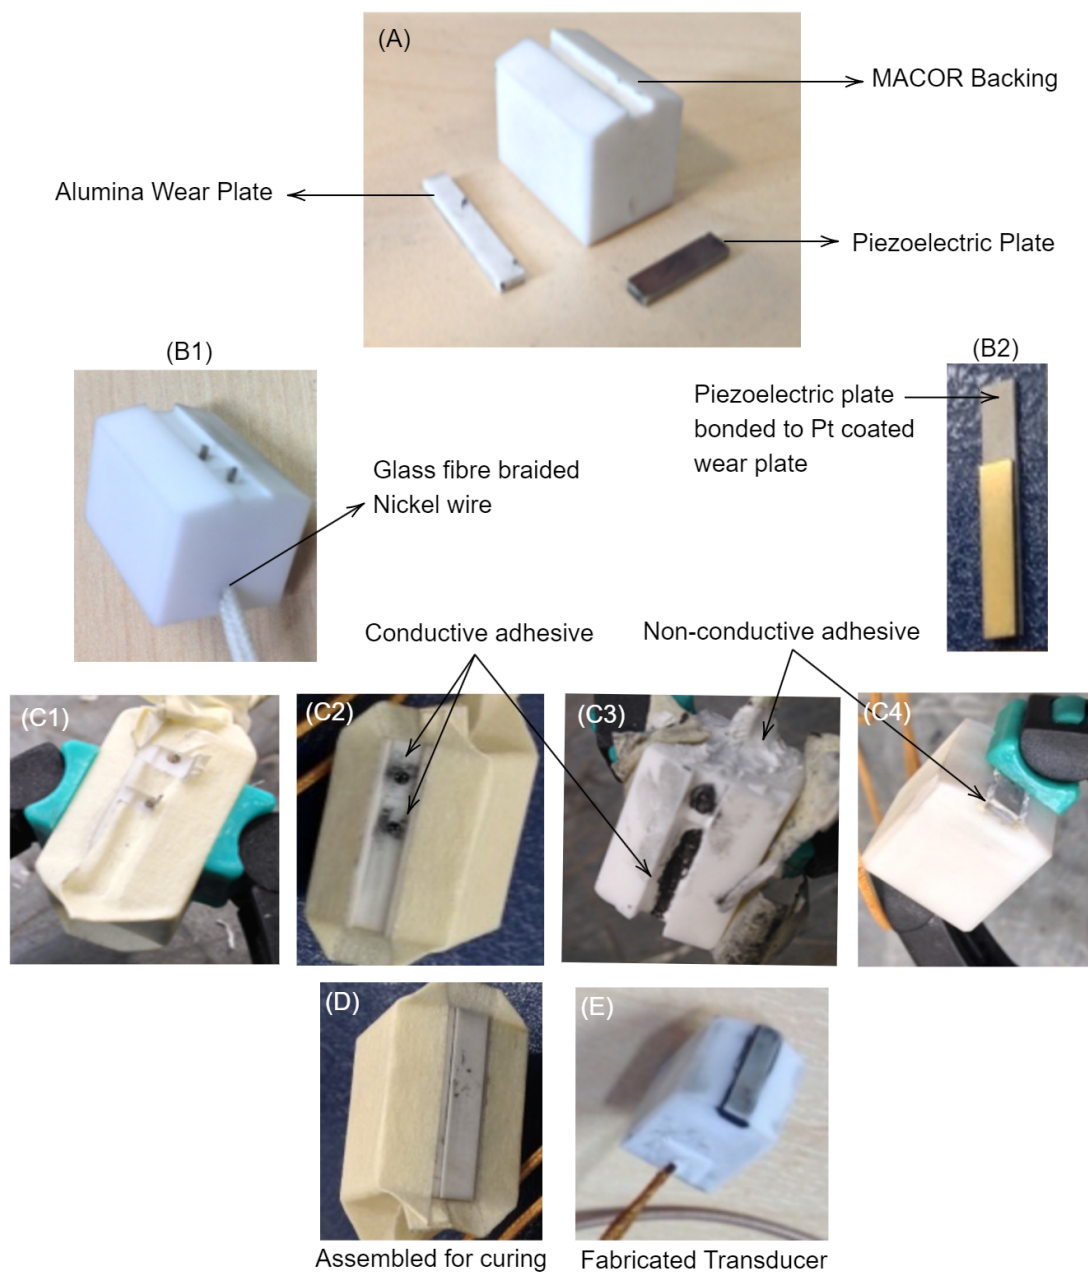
Fabrication of HT-UGW transducer prototypes showing the assembly of transducer layers and electrical connections.
